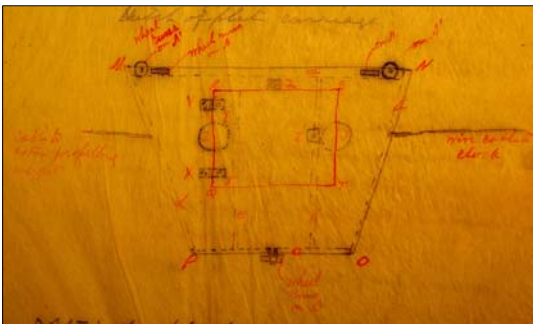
Plate carriage drawing showing the top plate overlay on the skeletal frame; the position of the plate-holder is marked in red (Campbell Copy Book – Mary Lea Shane Archives).
